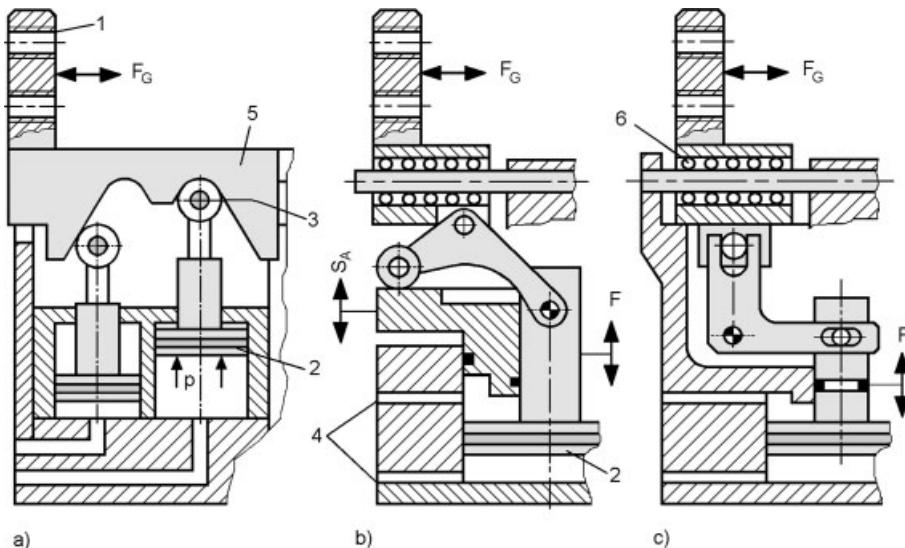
Parallel jaw gripper with pneumatic drive
